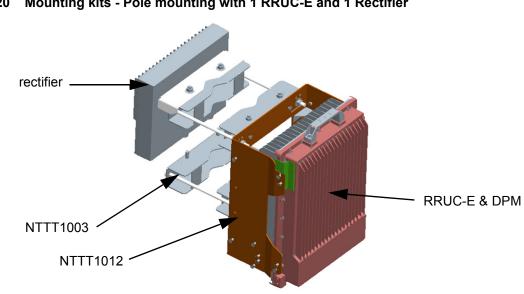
Mounting kits - Pole mounting with 1 RRUC-E and 1 Rectifier
